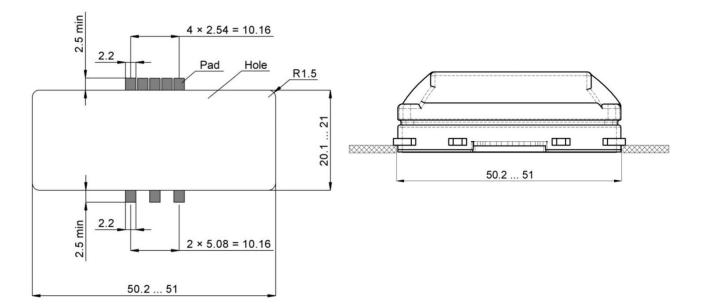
Recommended mating board configuration (all dimensions are in millimeters)
